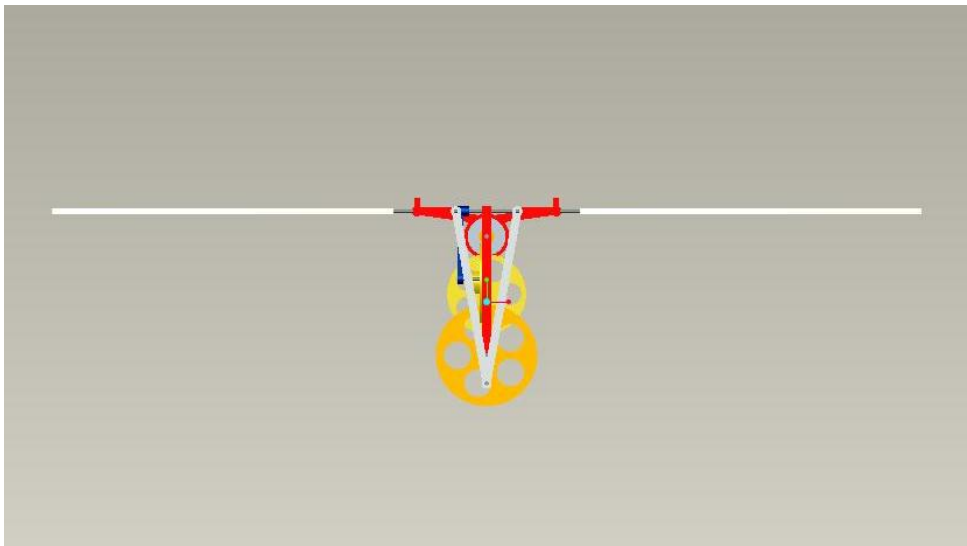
Front view of the combined mechanism. This view shows the four-bar mechanism that causes the wings to flap.
